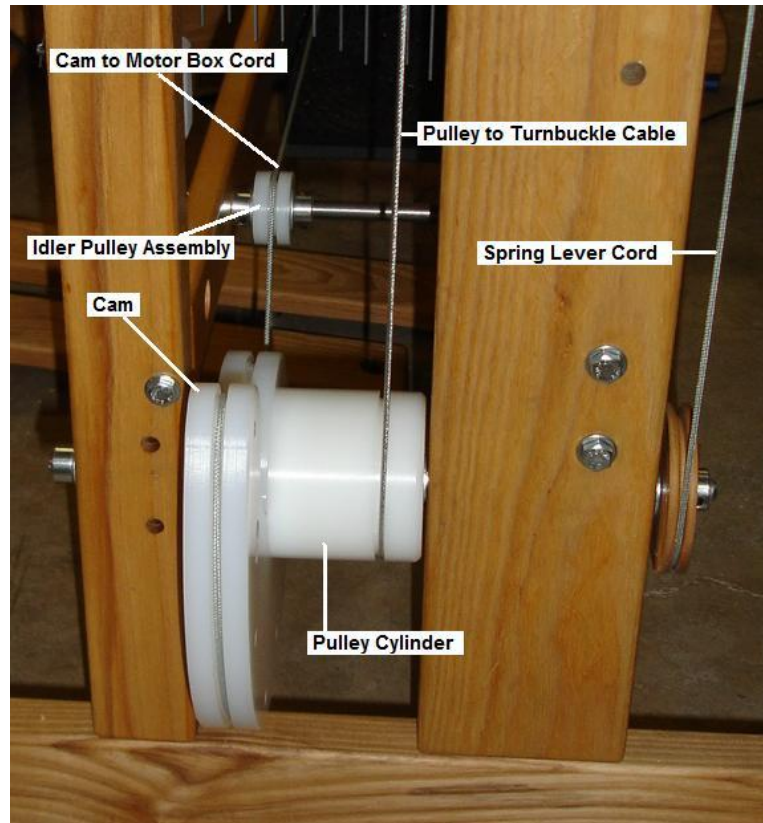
Cam-Pulley Assembly with cable & cord routes
